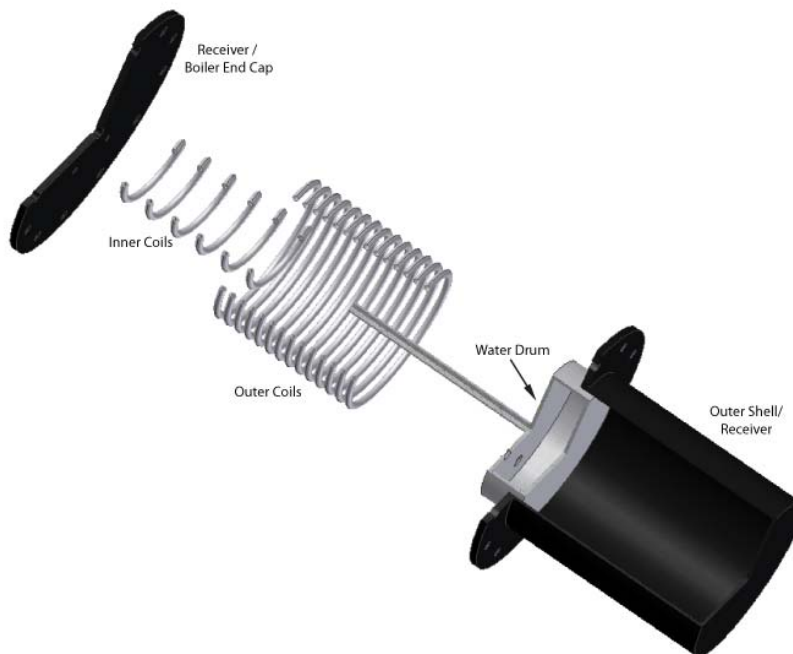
Exploded Three-dimensional layout of the receiver/boiler.
